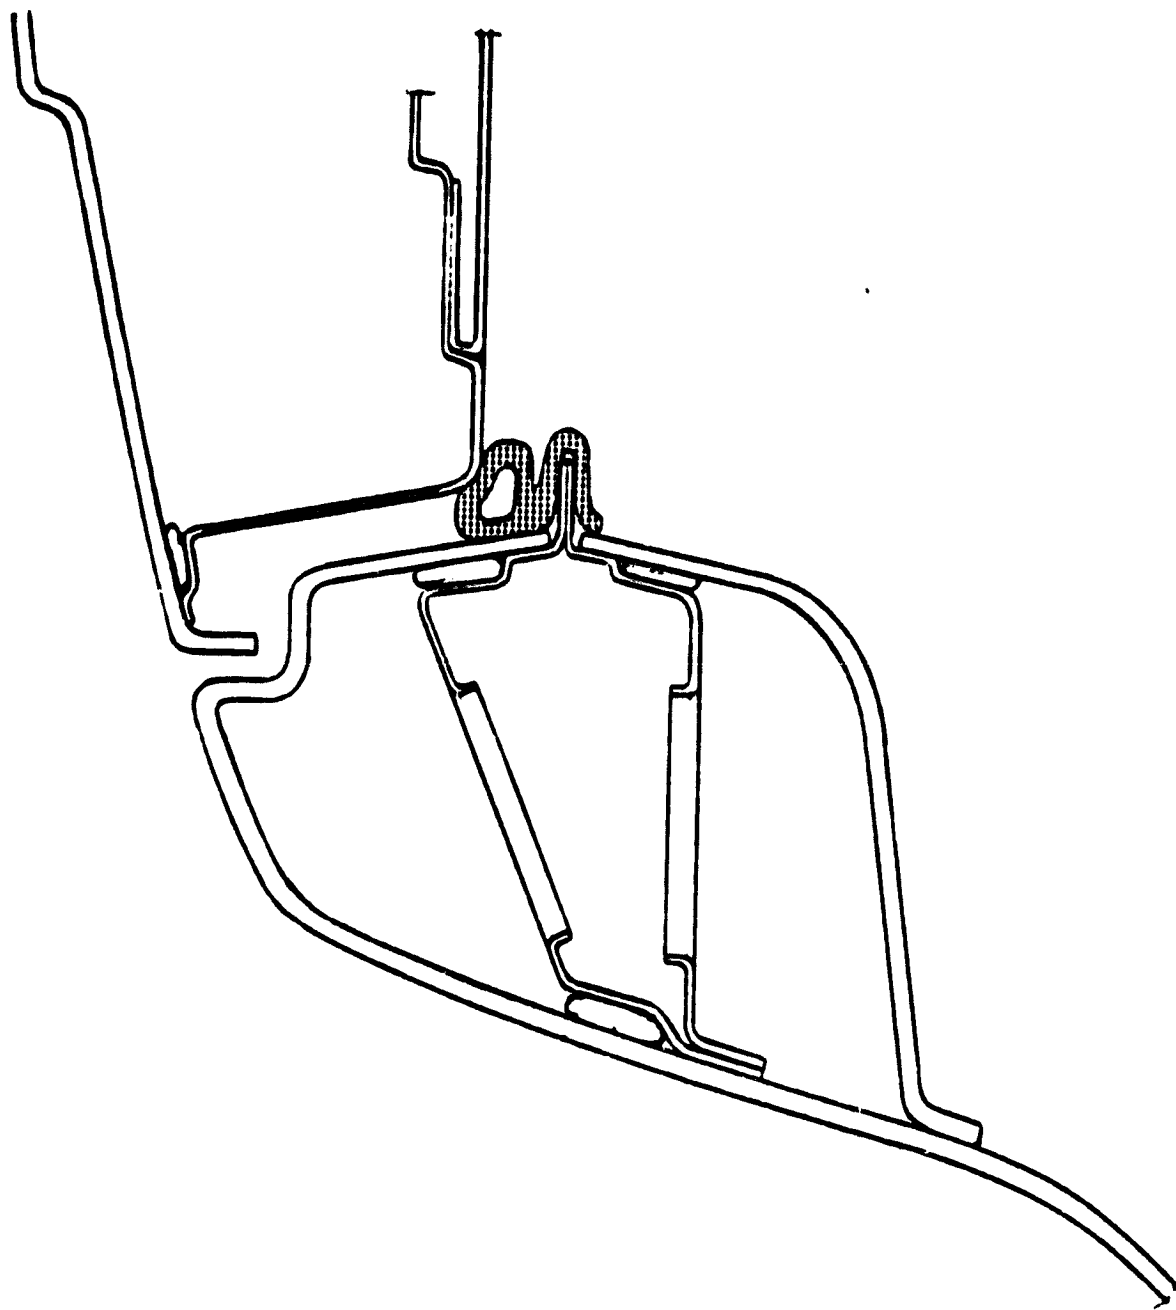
SILL/ROCKER PANEL & LOWER DOOR EDGE SECTION
